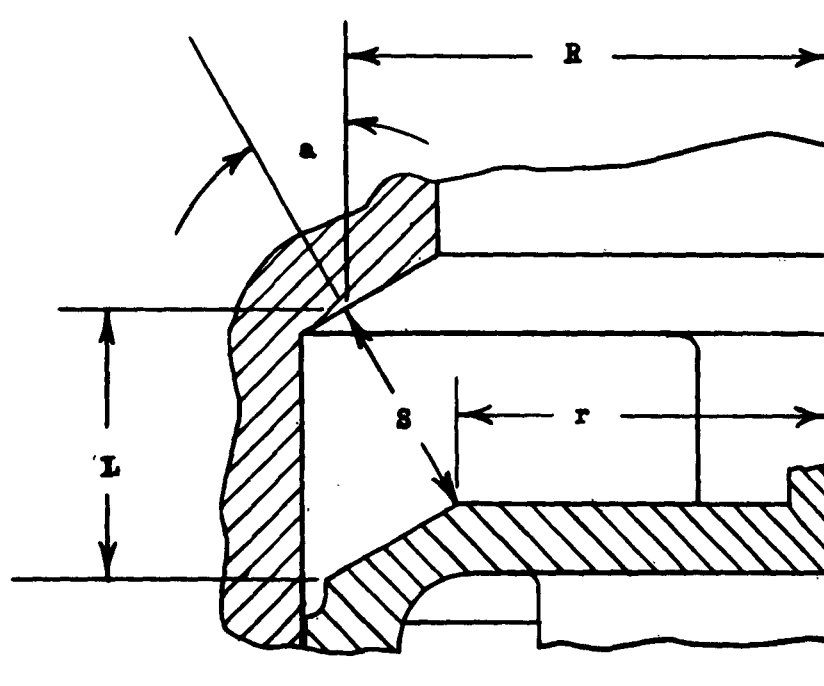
FREE AREA THROUGH VALVE OPENING.
